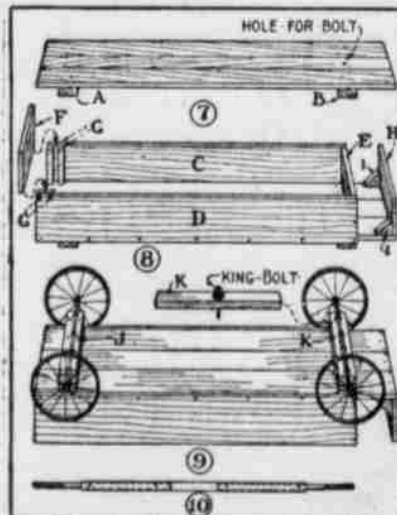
shows the wagon bed. Fasten the boards together by means of the two-by-four crosspieces A and B. Then cut the side boards C and D and nail them to the edges, and cut the end boards E and F to fit between. Fasten end E between the sides, and form grooves by means of the strips G (Fig. 8) for the end F to drop into. Dashboard H is of the same size as E. Brace it with the brackets I.
